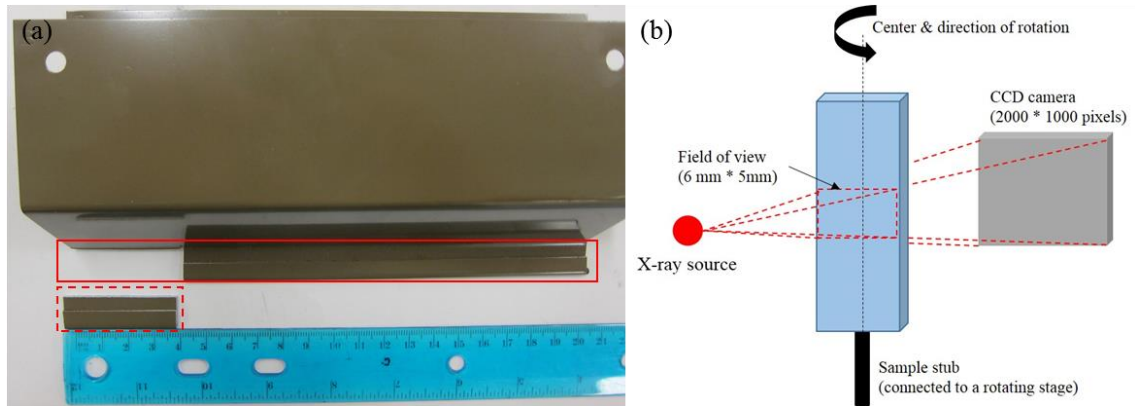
(a) Top view of the AA6111 full-size hem flange coupon showing a segment of the hem flange removed for CT imaging. (b) CT scan setup.
